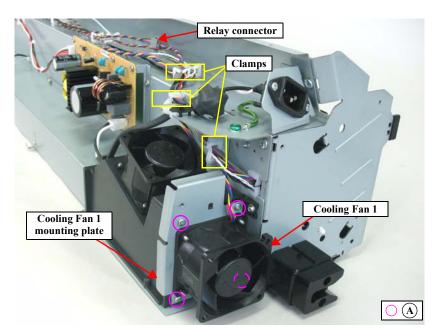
Removing the Cooling Fan 1 mounting plate
